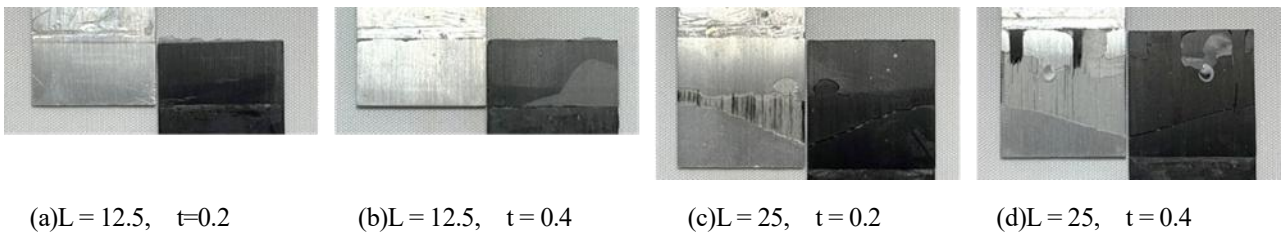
Typical macroscopic fracture surface of CF2/8 type
